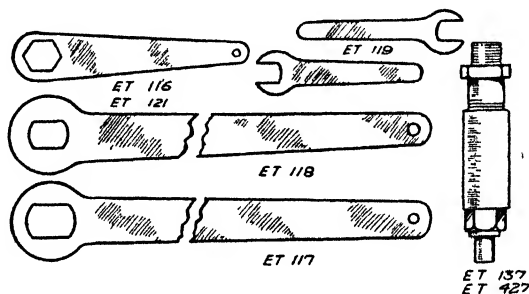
Spanners and Cleaning Tools for use with Nozzles and Nozzle Holders.
